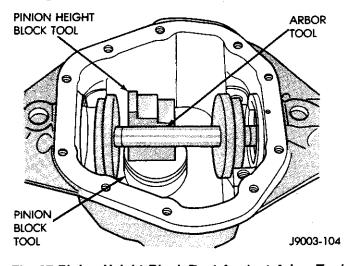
Pinion Height Block Tool Against Arbor Tool
